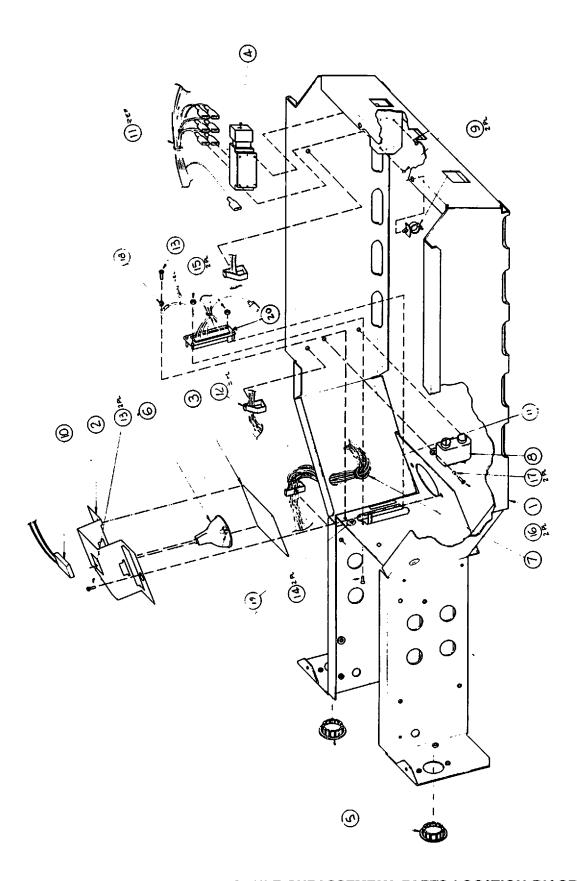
WARMER MODULE SUBASSEMBLY, PARTS LOCATION DIAGRAM
